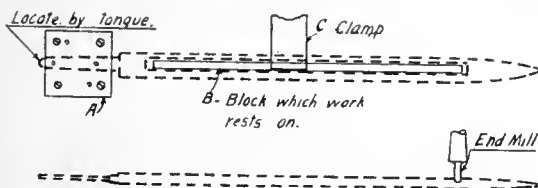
METHOD OF MILLING OUT CORNERS IN GROOVE
